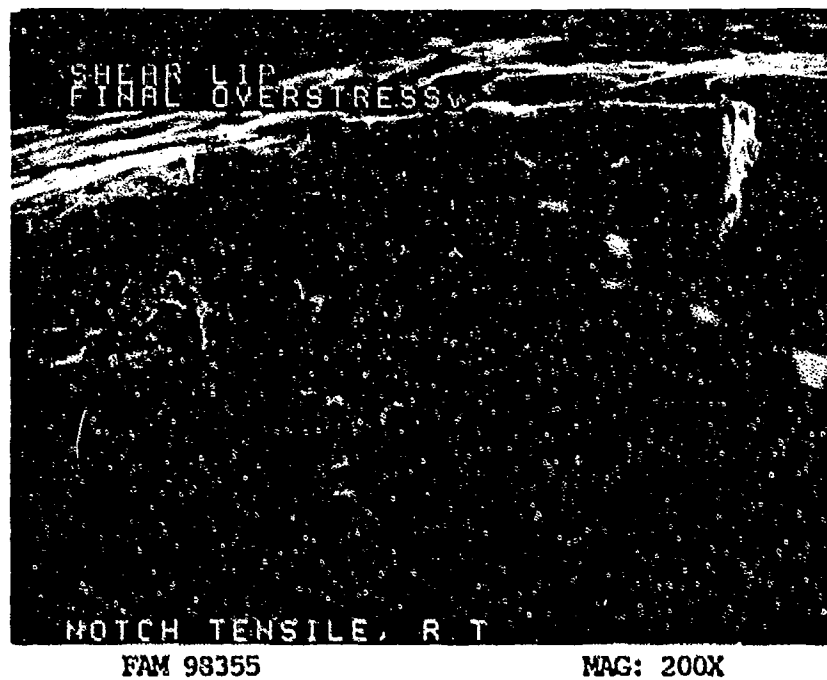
Higher magnification photograph including the shear lip area. The primary fracture has a slightly intergranular appearance.
